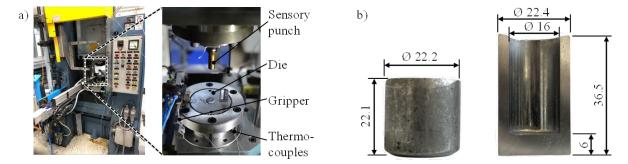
Experimental setup for temperature measurement in punch and die during cyclic cold forging a) press and tool set, b) workpiece.
